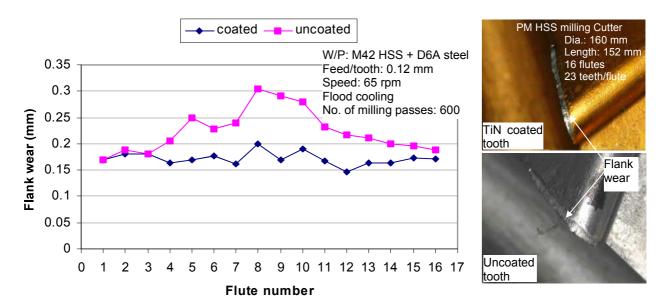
Flank wear in TiN coated and uncoated teeth of a half-length coated milling cutter.
